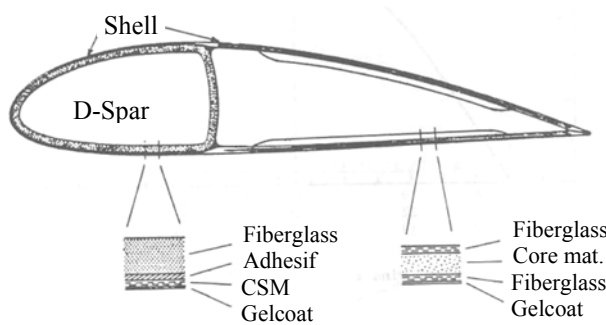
Typical cross section details of Danish TFT wound D-spar blades [28].
